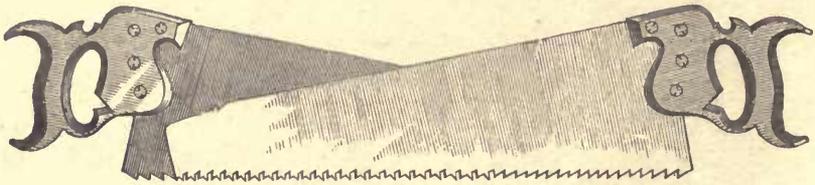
Double Cutting Action of M Tooth Hand Saw.
